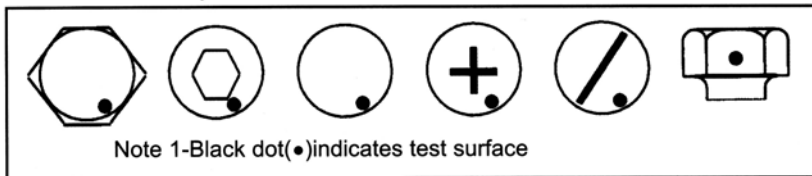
Significant Surfaces on Externally Threaded Fasteners
